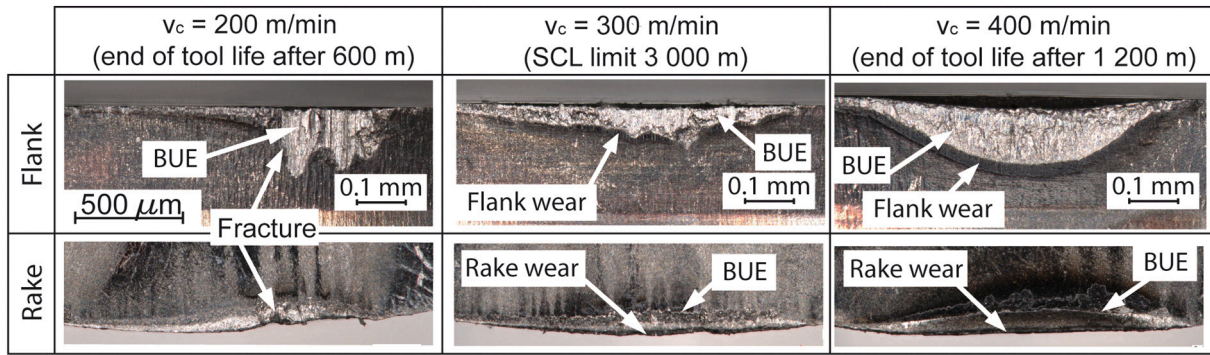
Tool wear comparison for tested cutting speeds at HPC 80 bar on the rake and flank surfaces at the end of tool life (or after reaching the SCL limit).
